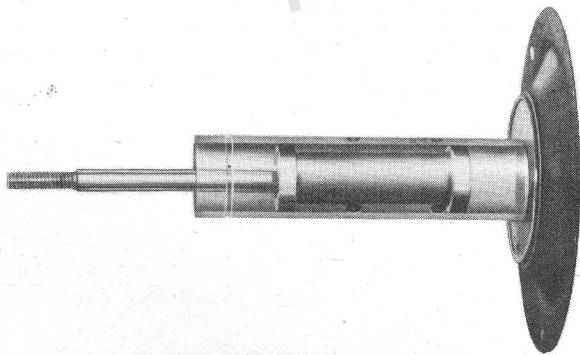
Phantom View of Electromatic Spool Valve and Sleeve Showing Ports and Metering Hole
